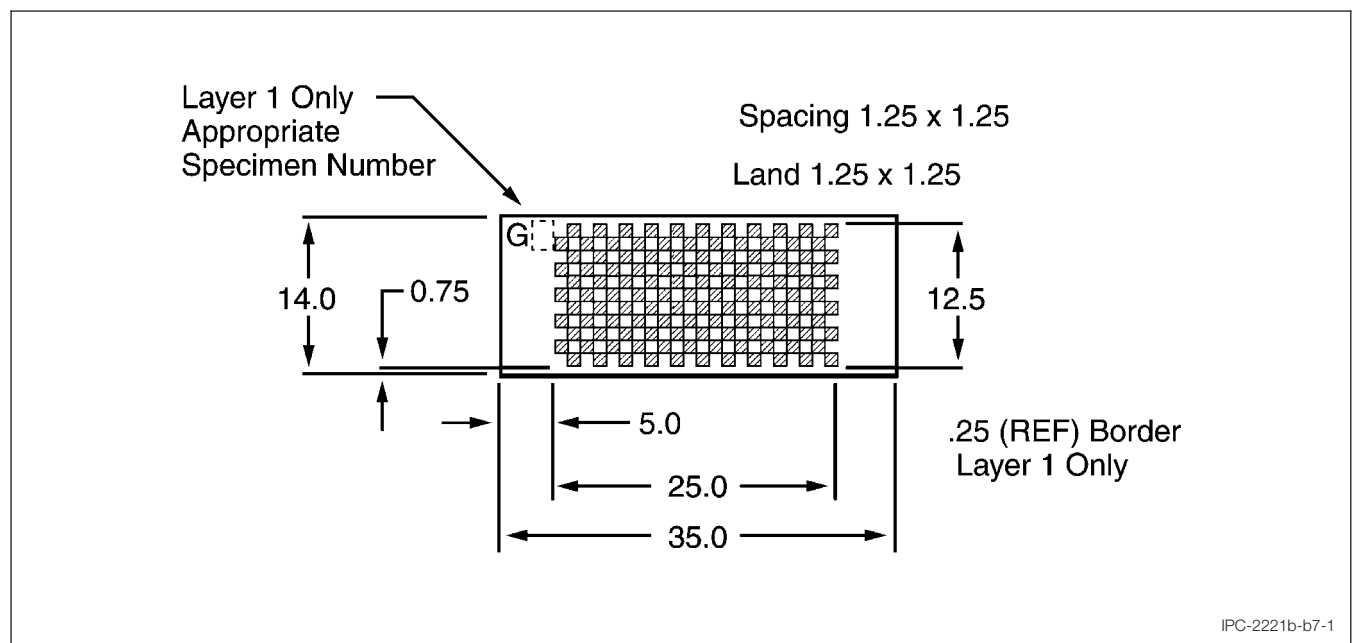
Test Coupon G, Solder Resist Adhesive, mm [in]
